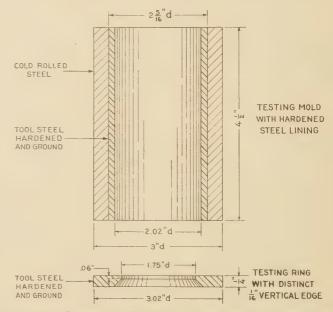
SUGGESTED DESIGN OF TESTING MOLD AND RING TO REDUCE WEAR.
